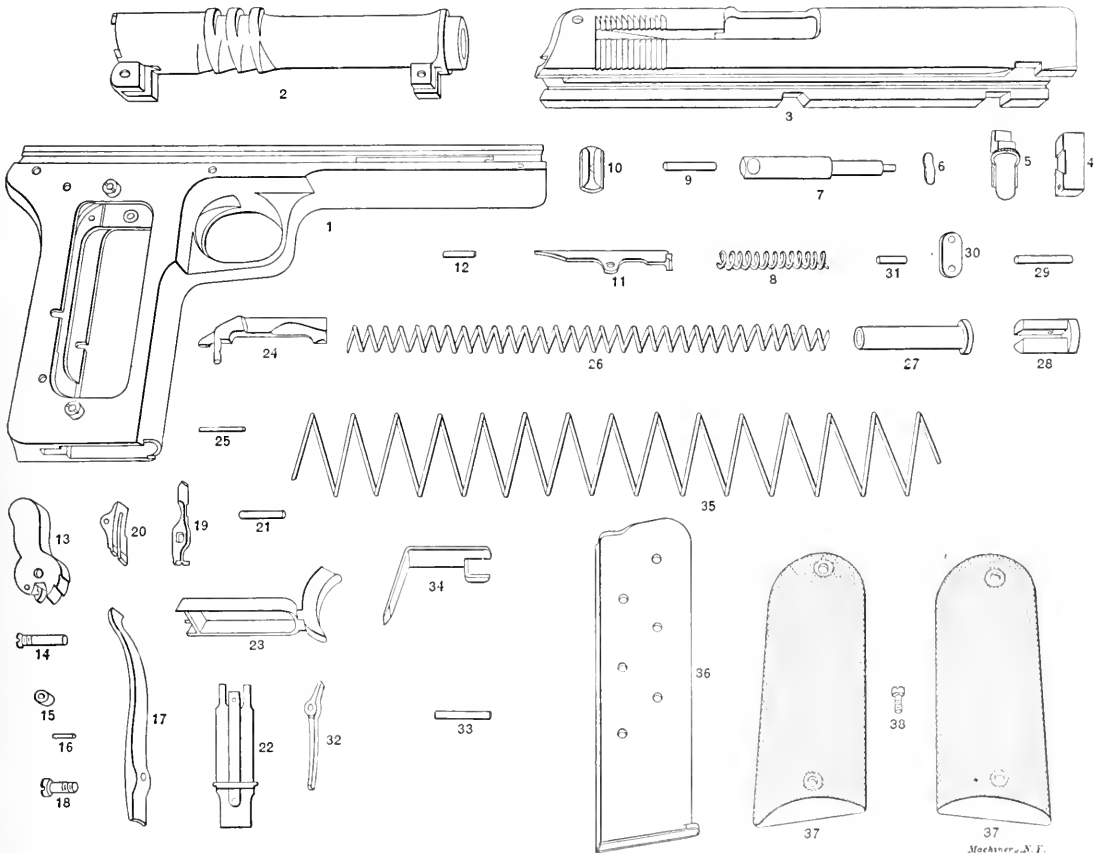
COMPONENT PARTS OF AUTOMATIC COLT PISTOL, CALIBER 0.45.
